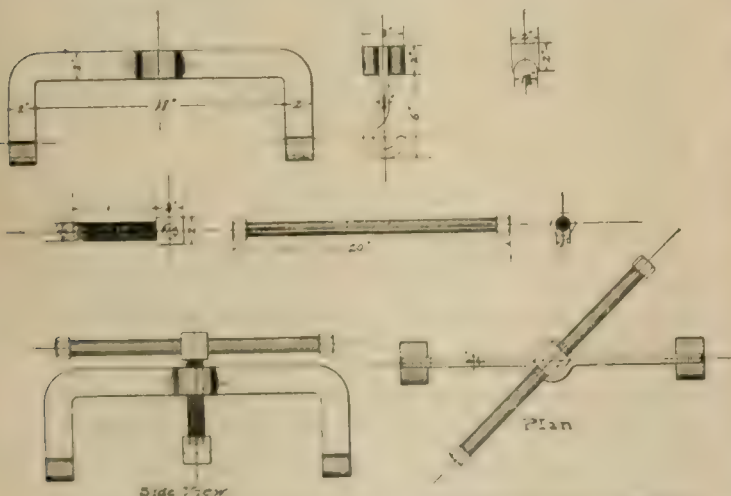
DETAIL, SIDE ELEVATION AND PLAN OF JIM CROW.
